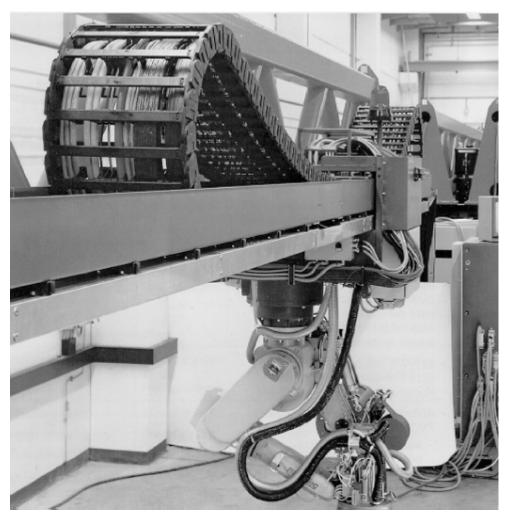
Example of using the PROFIBUS trailing cable in a drag chain
